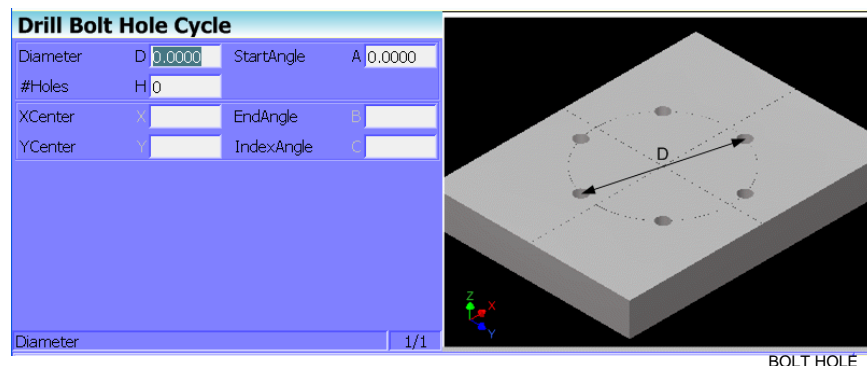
, Drill Bolt Hole Cycle Graphic Menu
